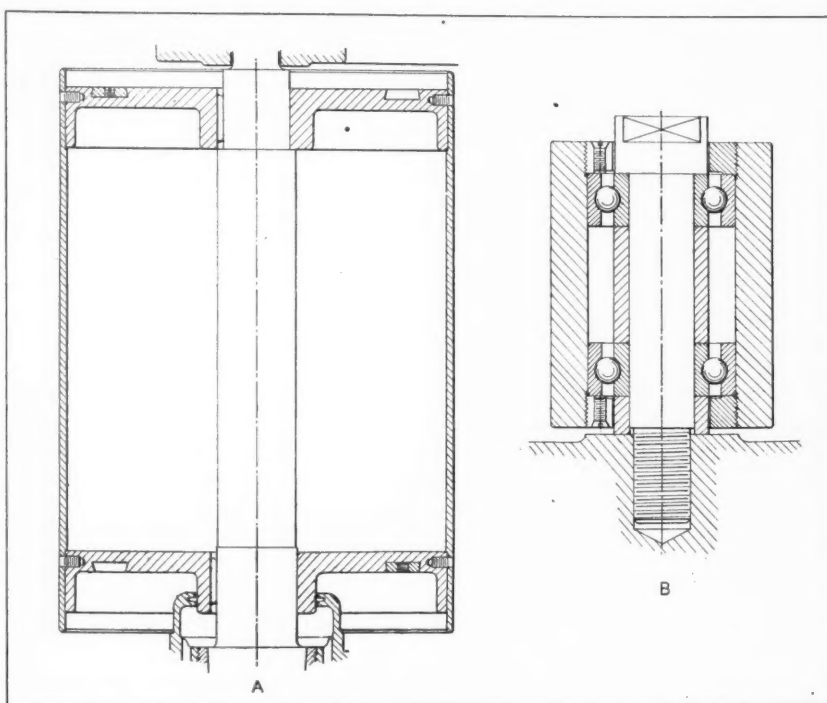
Balanced Drum and Simple Ball-bearing Idler Pulley
